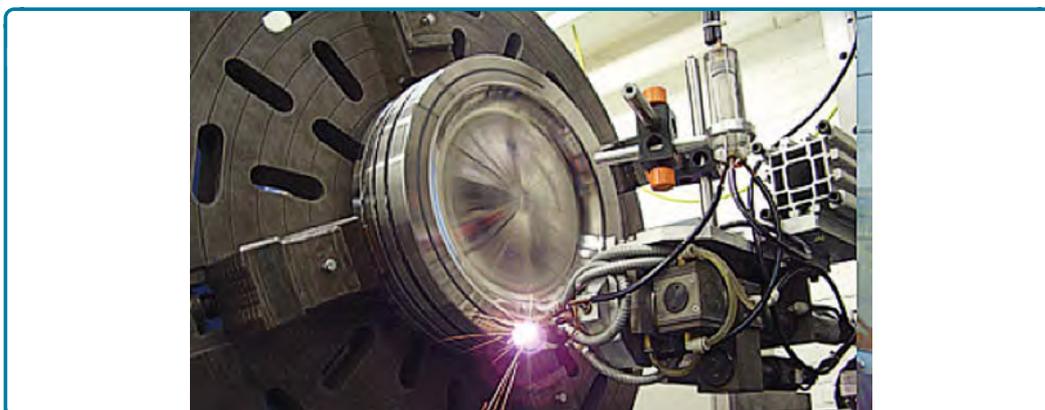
High corrosion resistance component machining ^[13].
